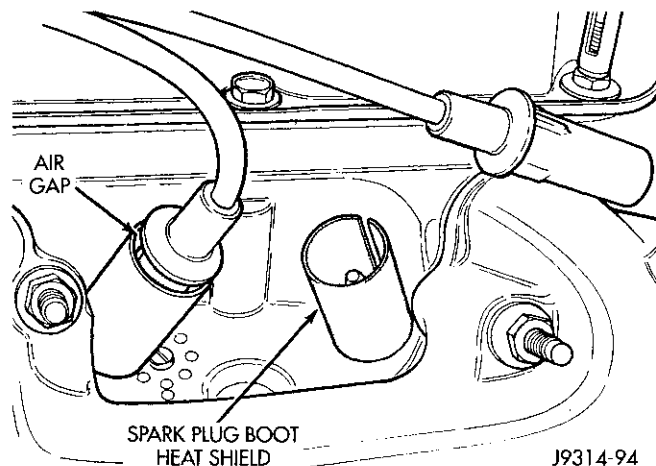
Heat Shields—3.9L/5.2L/5.9L Engines
